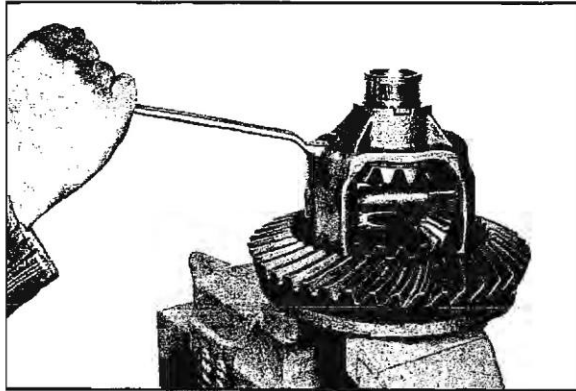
Installing Pinion Shaft Locking Bolt
